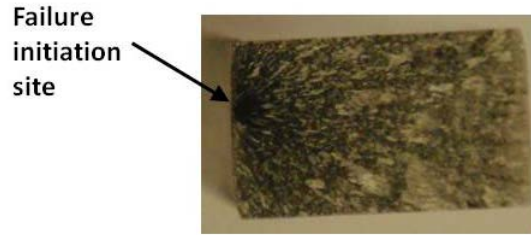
Fracture surface of a VE 510A tensile specimen.
